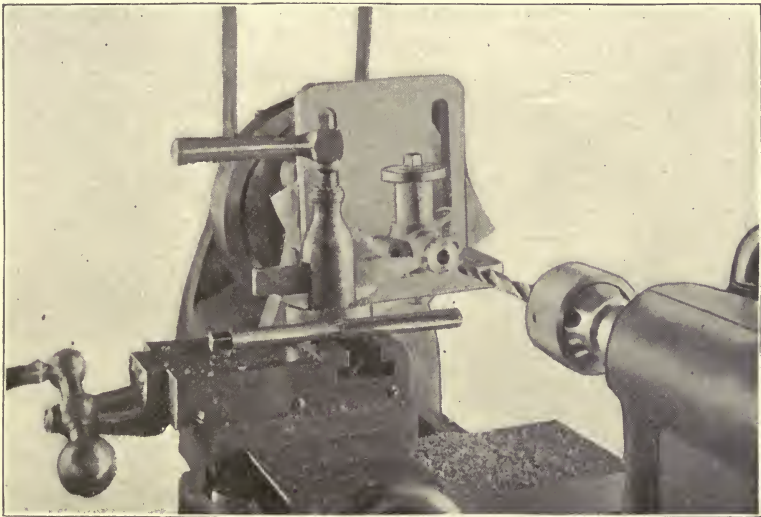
DRILLING AND REAMING CONNECTING ROD HEAD TO FIT ROD.
